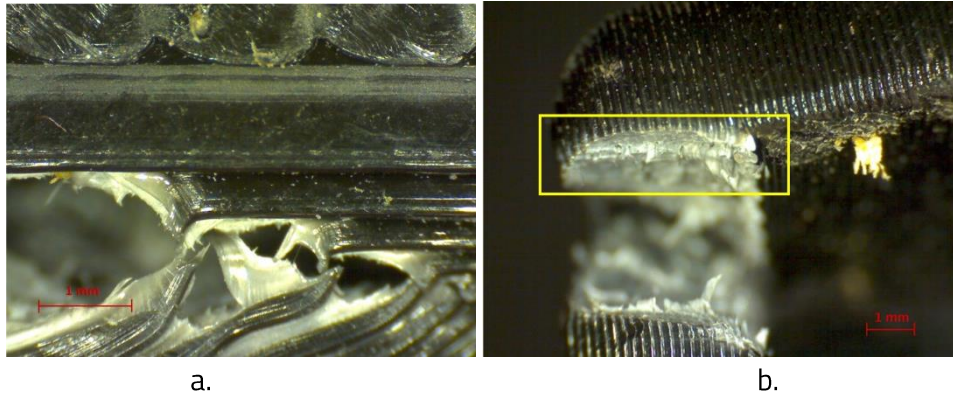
3D–printed black PLA connector (position 1) under tensile stress, longitudinal section (a), cross section (b)
